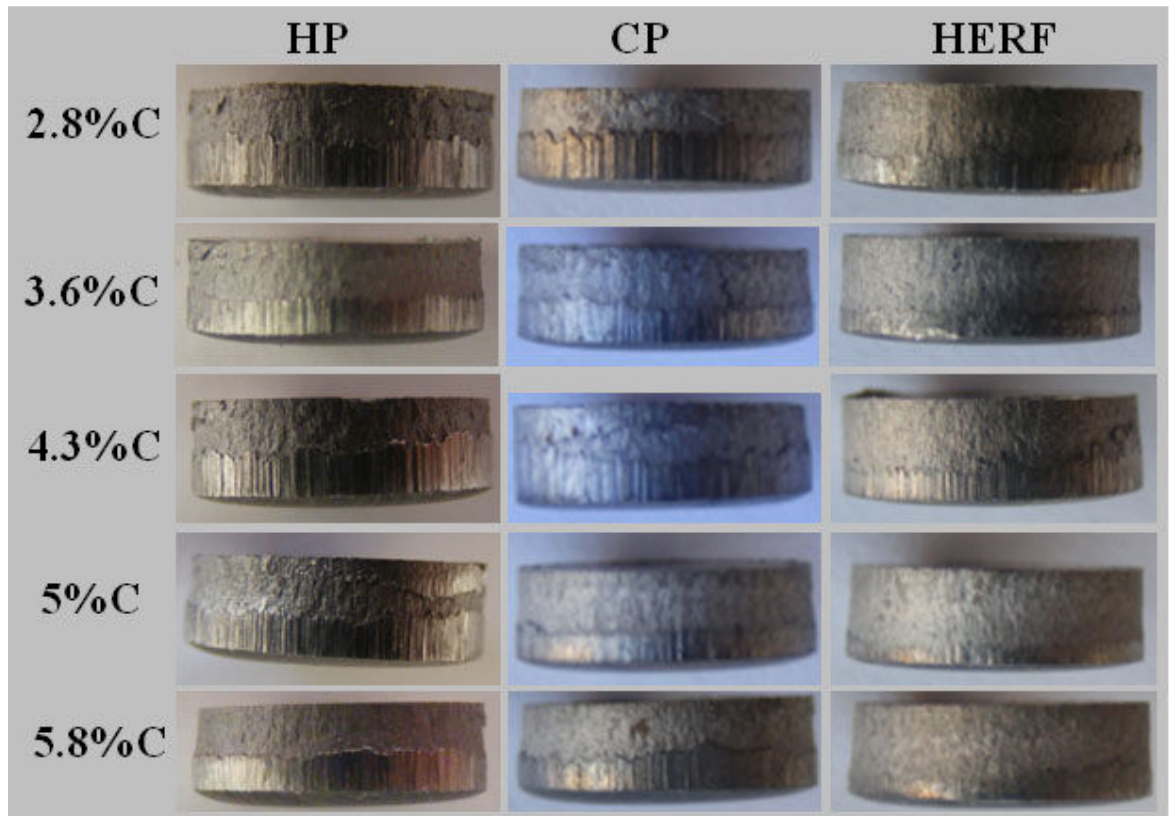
Shear and fracture surfaces of the mild steel material according to the press type and die clearances
